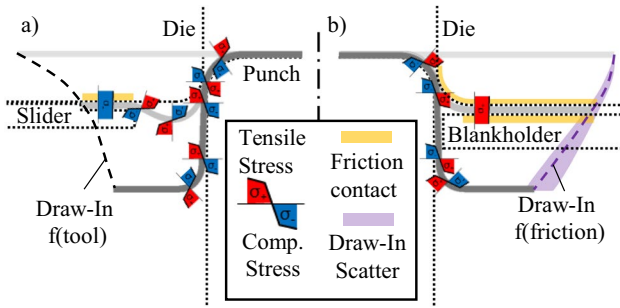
Schematic representation of the tool setup for a Transversal Compression Drawing (TCD) and b conventional deep drawing with blankholder and counter pad for the forming of open channel sheet metal parts based on [22]
